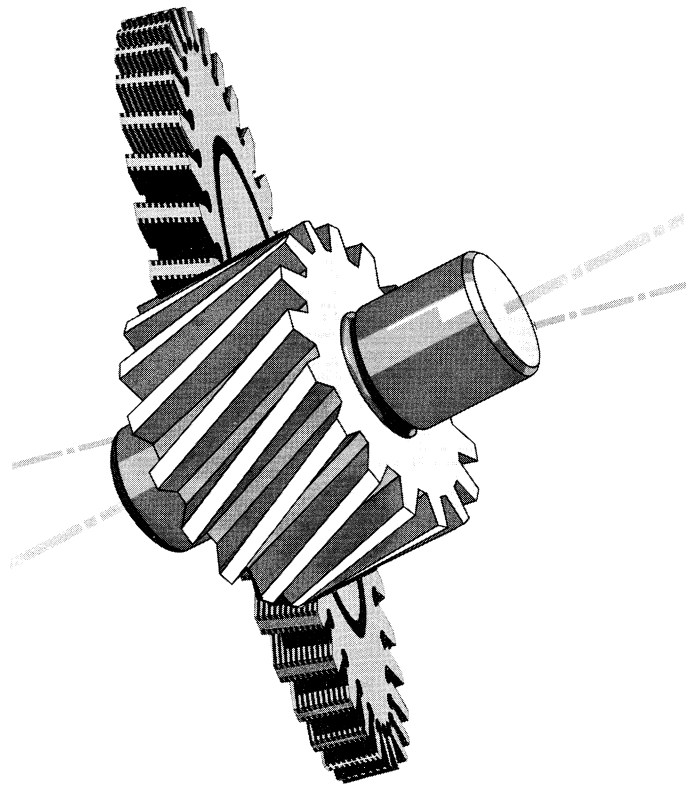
The crossed-axes relationship between a shaving cutter and the work gear with rotary gear shaving.
